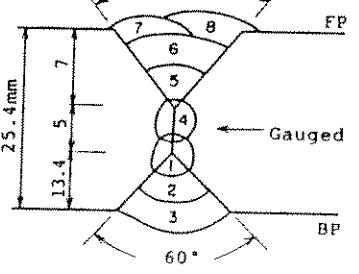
Welding Procedure for A 537 a.c.
